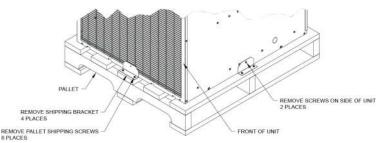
Standard Packaging with Shipping Brackets -Front View
